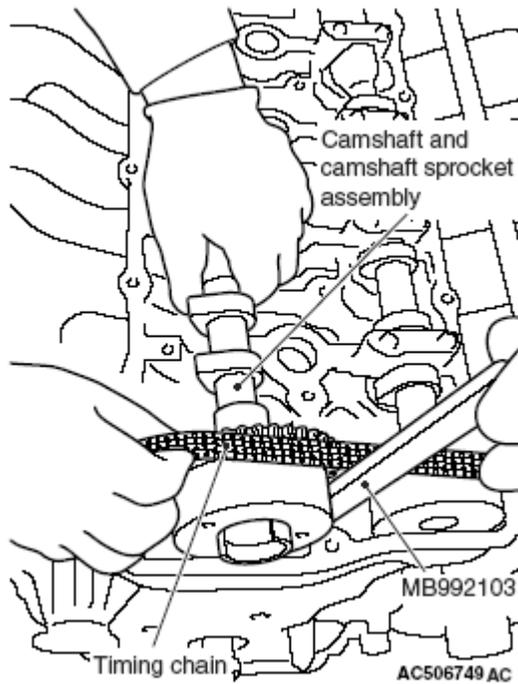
Identifying Timing Chain, Camshaft And Camshaft Sprocket Assembly (Exhaust Side)
